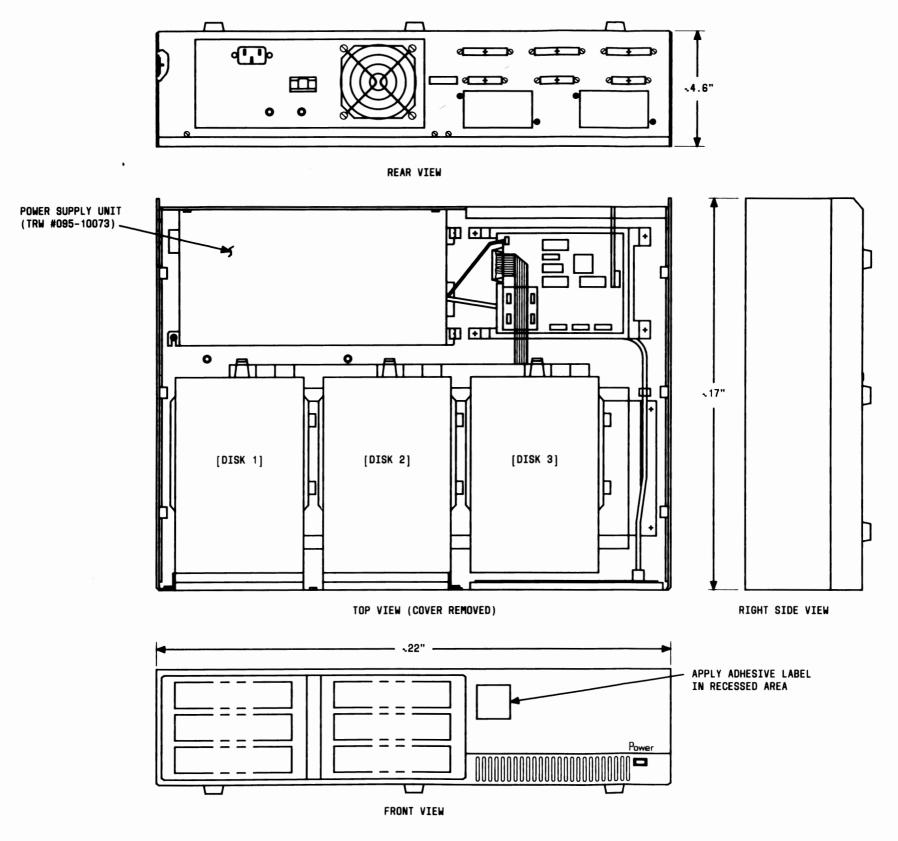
International AT&T XM/405S/900S Cabinet Assembly Drawing (ED-3T027-30)
